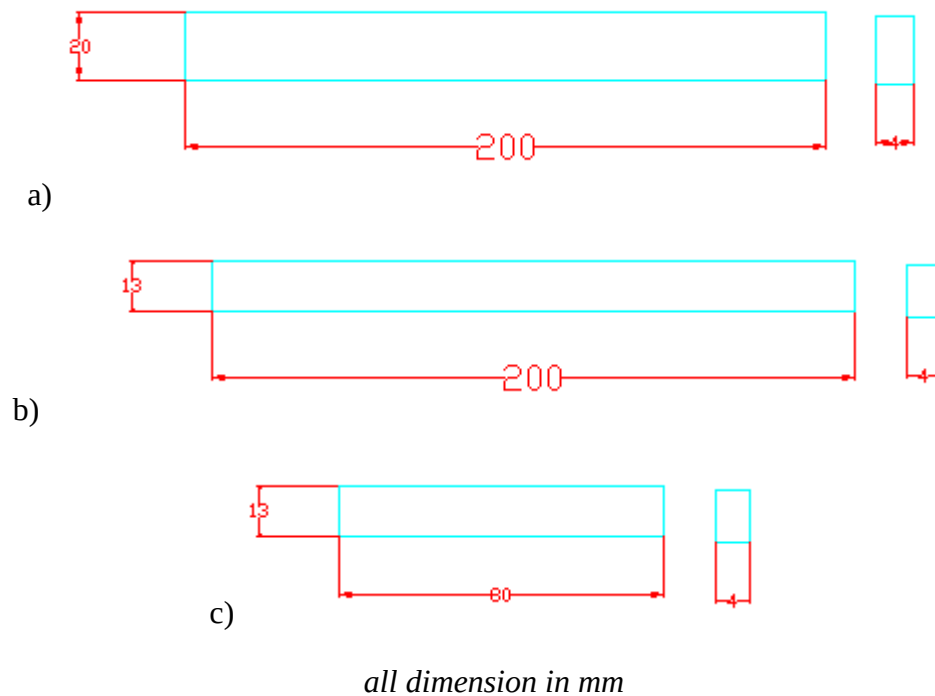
9 Test Specimen with Dimensions- (a) Tensile Test Specimen
